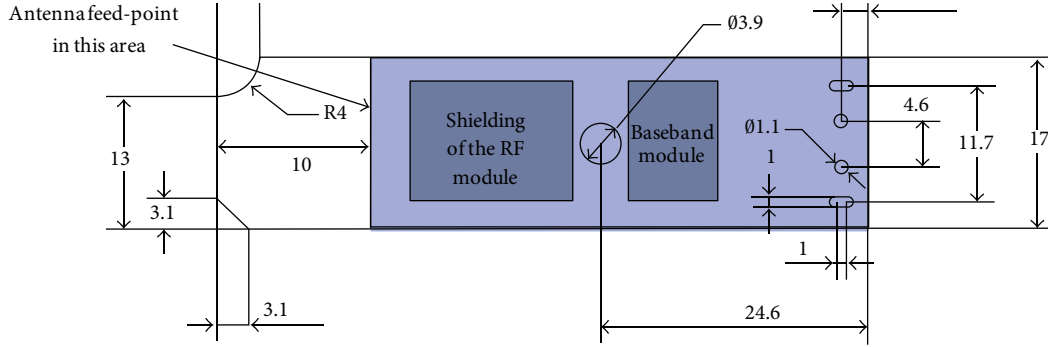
PCB layout sketch of the WLAN USB dongle (dimensions in mm).
